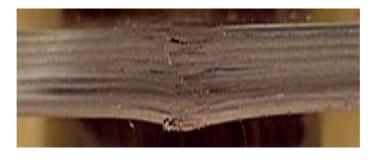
Macro-photograph of the sectioned face of the [0/45/90]_{4s} composite plate.
